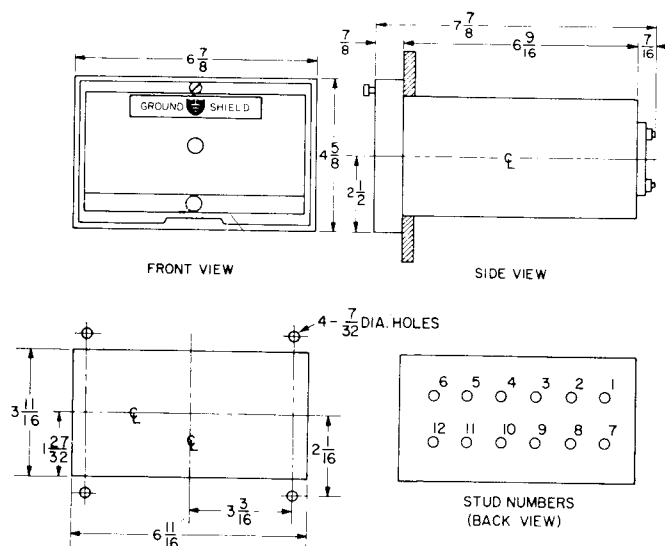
Semi-Flush Mounted Relay Outline and Drilling
